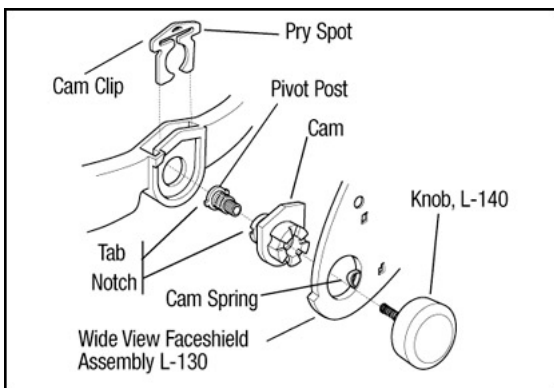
Removing and Attaching a General Purpose Wide View Faceshield L-130 (L-901SG)
